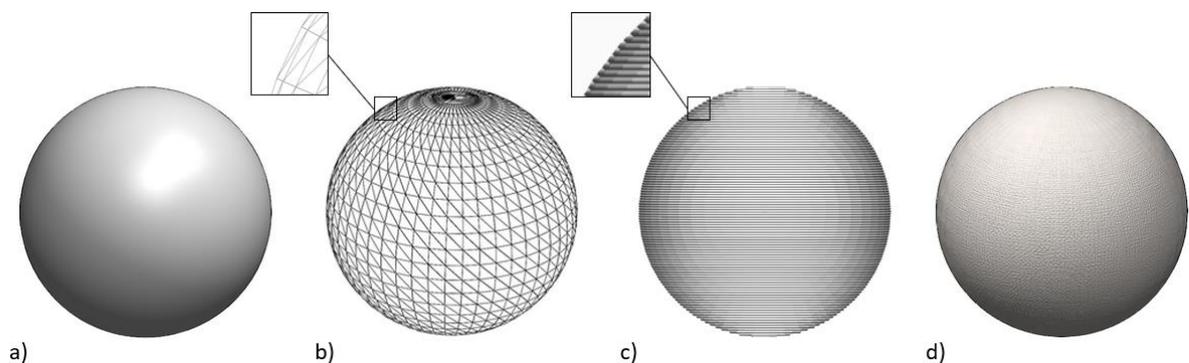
Additive manufacturing steps showing a) 3D geometry description, b) STL standard data interface, c) slicing and tool path design, and d) final part.
